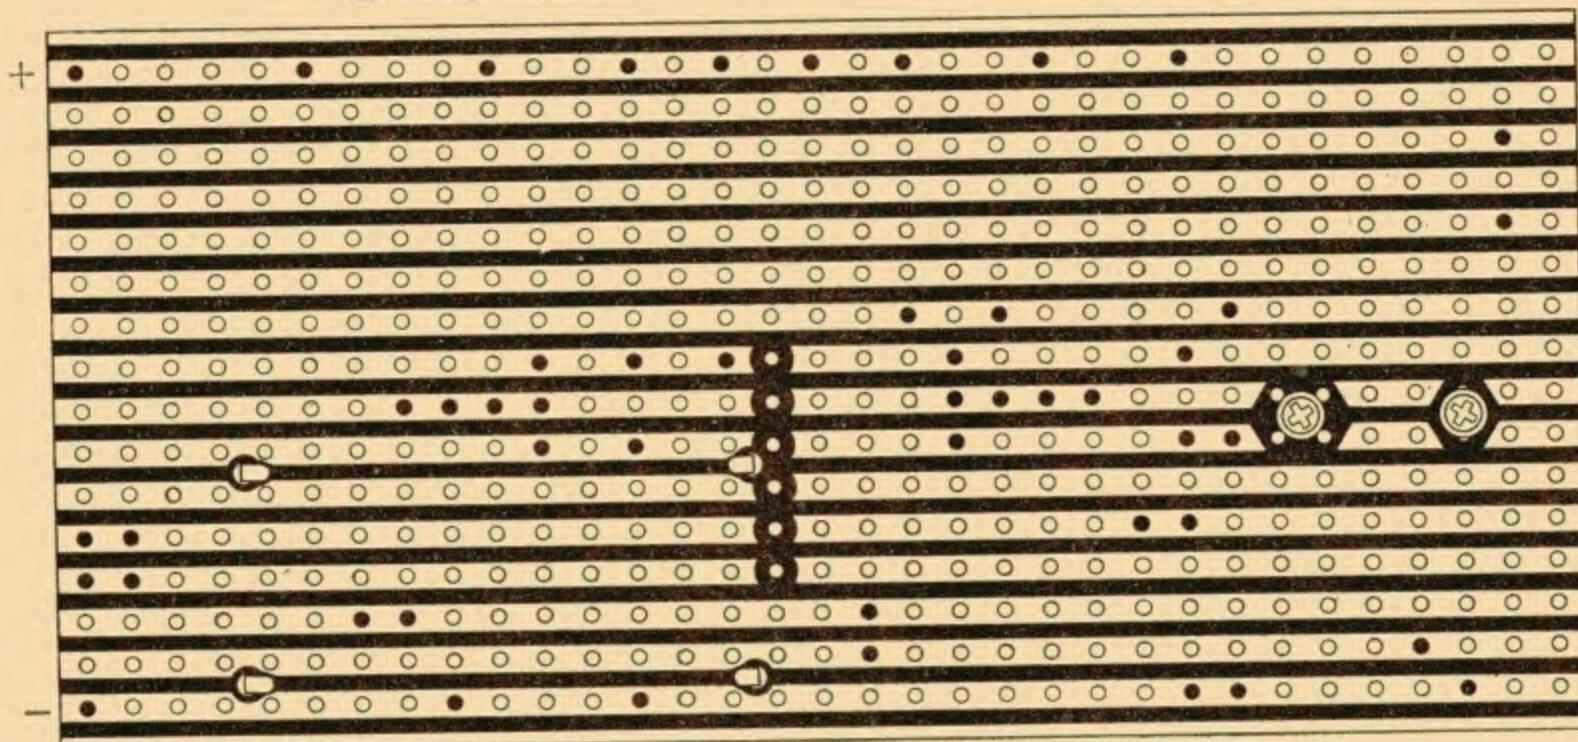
Underside view of the control unit. The black dots indicate the holes which are used for component wiring
